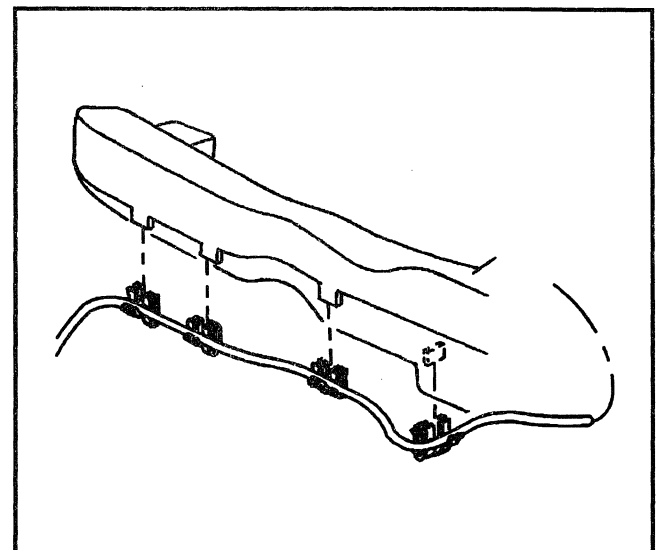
Antenna Extension Cable Routing to HVAC Duct
